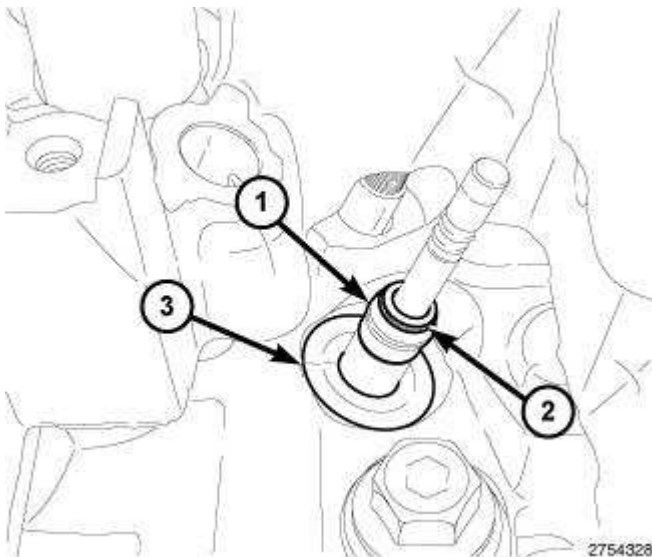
Spring Seat, Valve Guide Seal & Garter Spring
